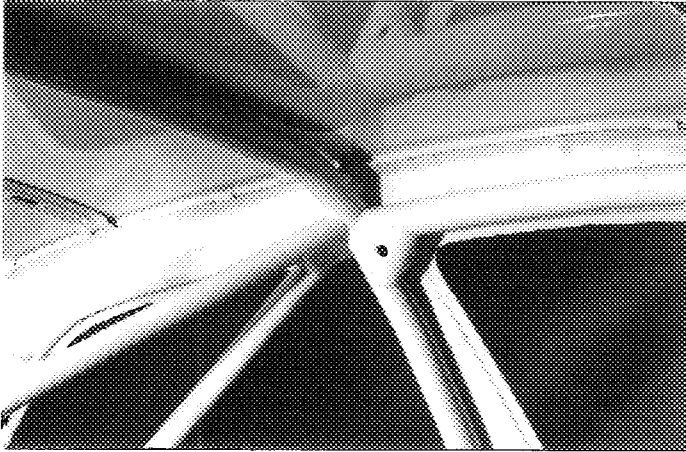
FRONT FRAMEWORK TO TURRET
